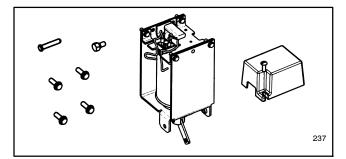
Replacement Solenoid Assembly with Core and Link (includes rectifier and cover, clevis pin, drive link screw, four mounting screws, and thread sealant)
